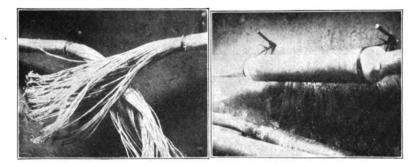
View Showing Cable Ready Fig. 33.—View Showing Completed for Splicing.
